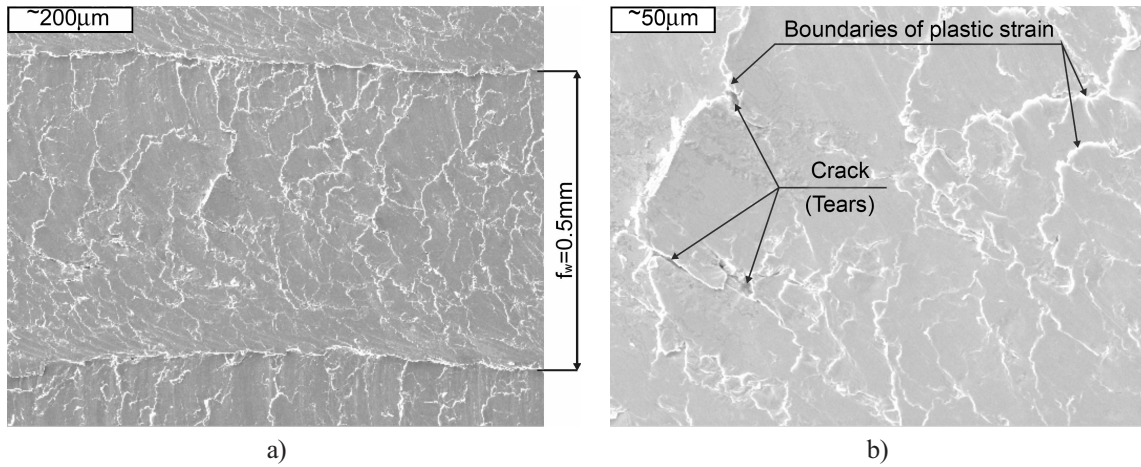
Surface morphology. The cutting conditions used were:  $f_z = 0.2 \text{ mm/tooth}$ ,  $a_p = 0.25 \text{ mm}$ ,  $f_w = 0.5 \text{ mm}$ ,  $D_c = 12 \text{ mm}$ ,  $n = 2500 \text{ rpm}$ , 45 steel workpiece material,  $0^\circ$  angle, out-cut milling; a) magnification of 90; b) magnification of 300.
